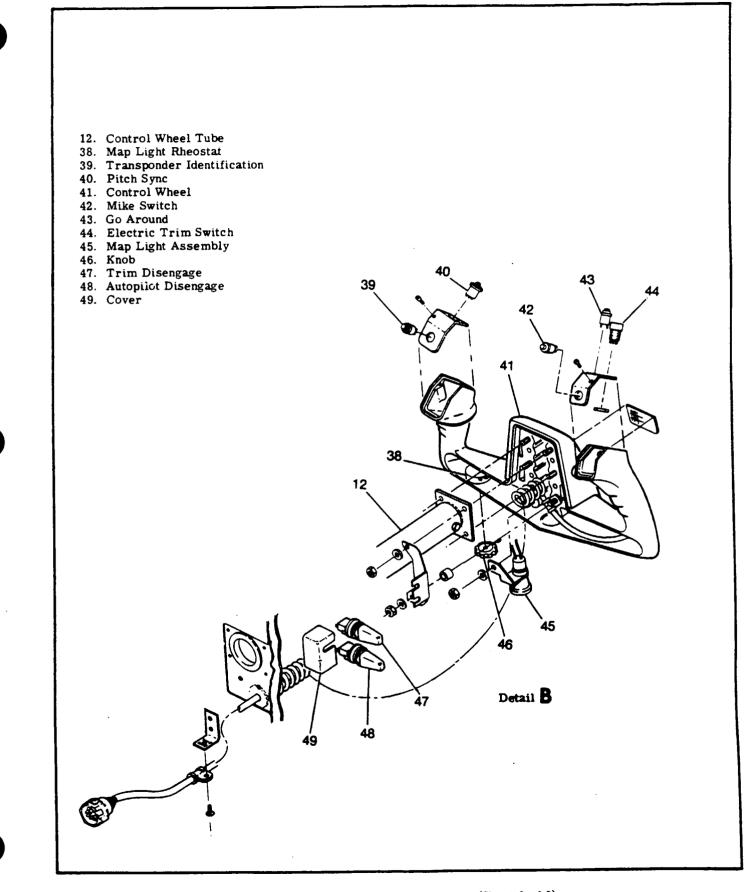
Control Column Installation (Sheet 3 of 3)
